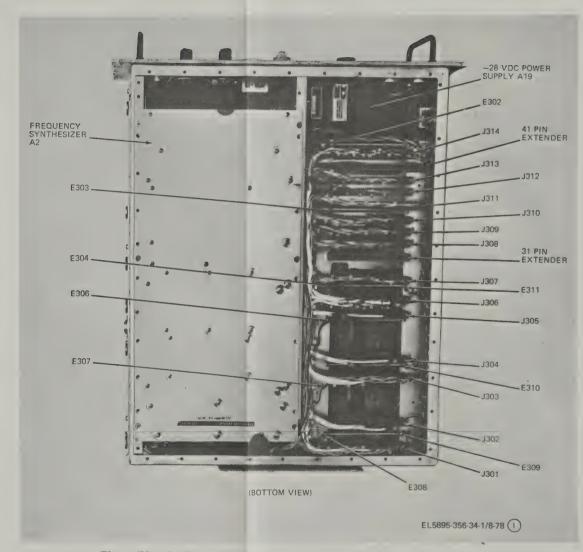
(). Transmitter chassis assembly (6A9/6A11) parts location diagram (sheet 1 of 3).
